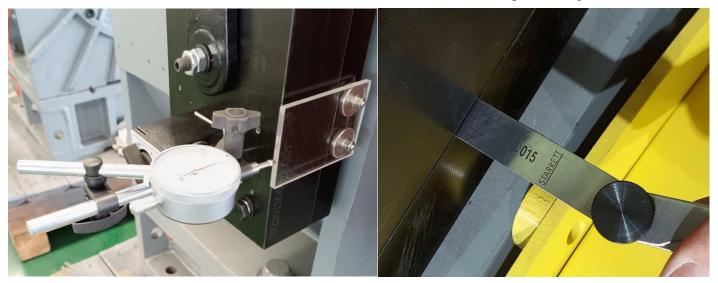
Use of the dial indicator (left) and feeler gauge (right) to confirm pad clearance.
